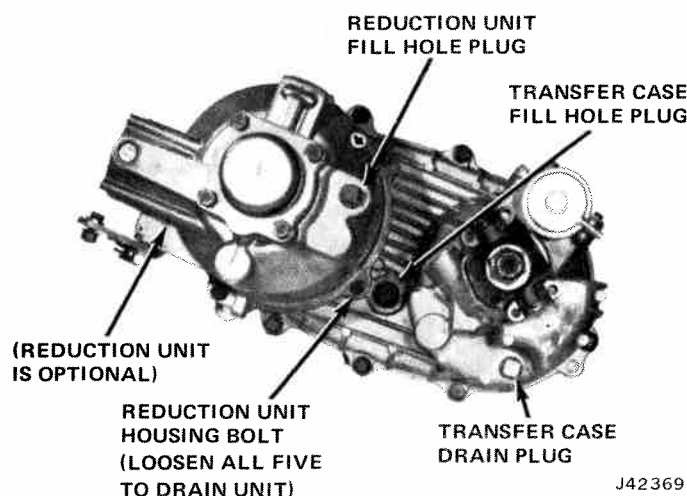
Quadra-Trac Drain and Fill Plug Locations
